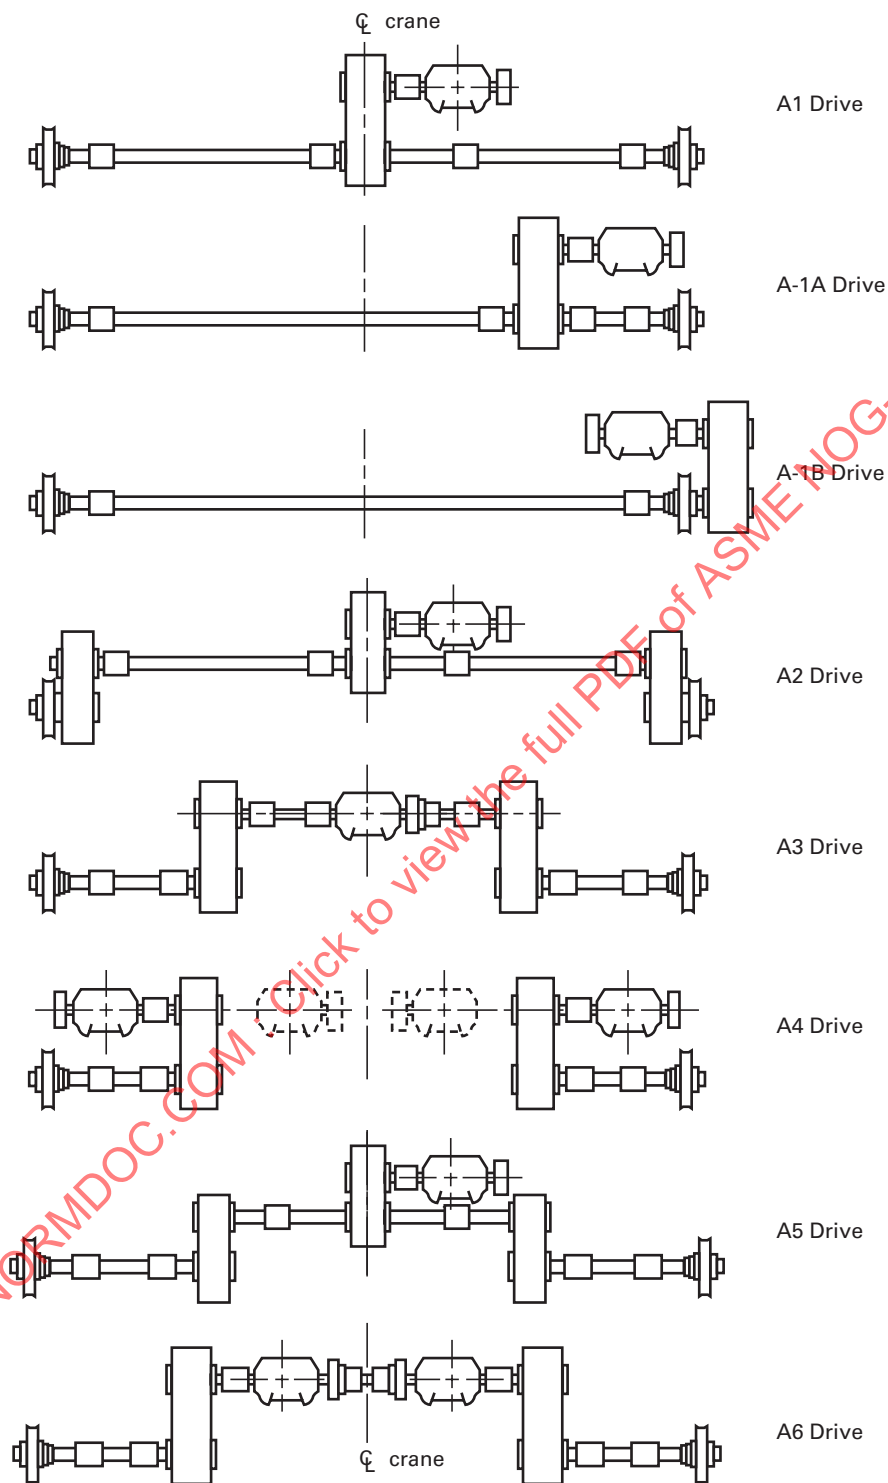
(a)-1 Arrangement of Crane Trolley Drives
